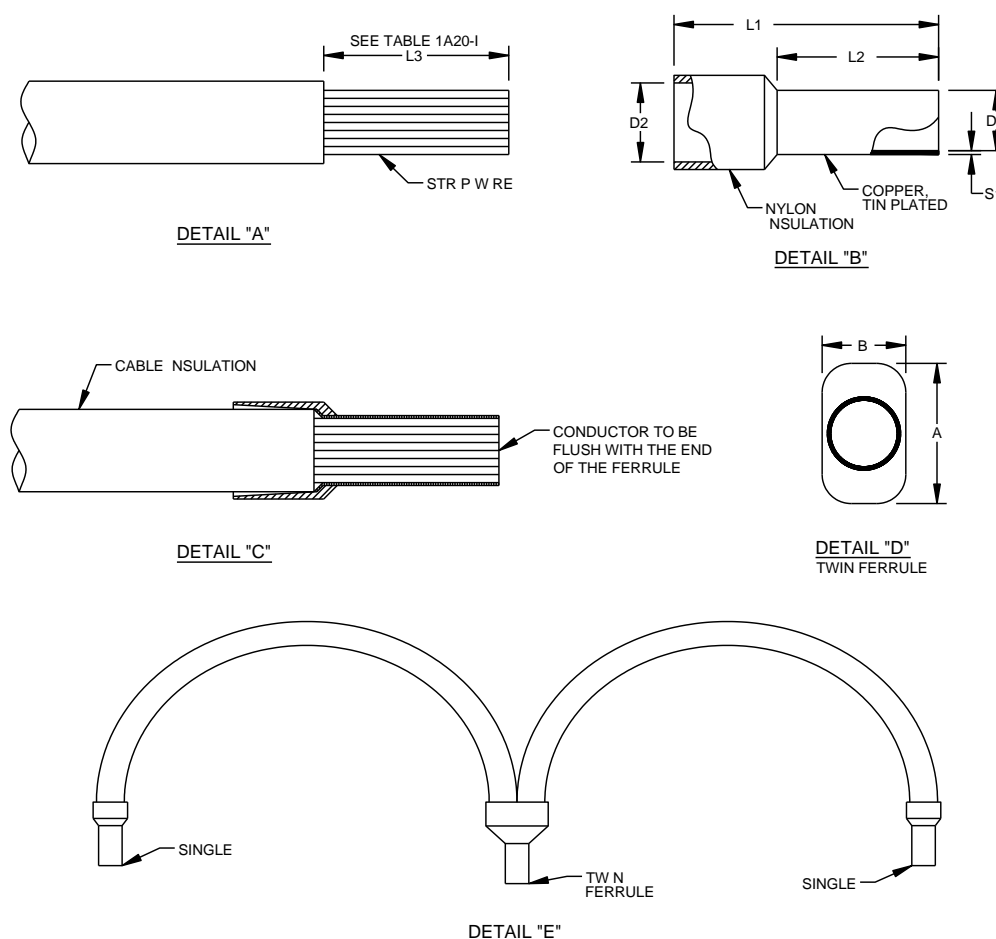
A20. Cable end preparation – screw clamp terminals (ferrules).
